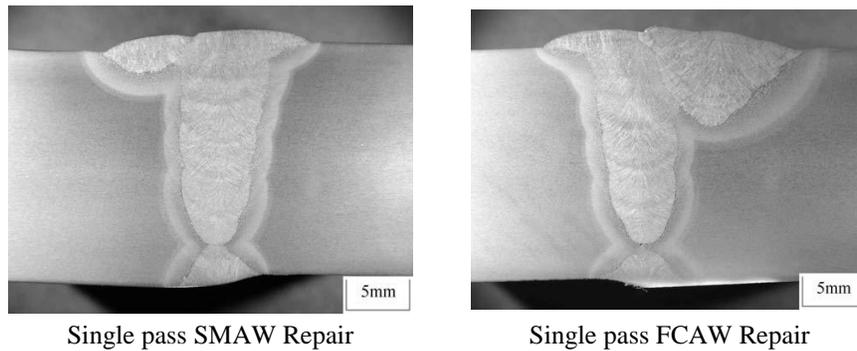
Weld Cap Repair Macro Sections
